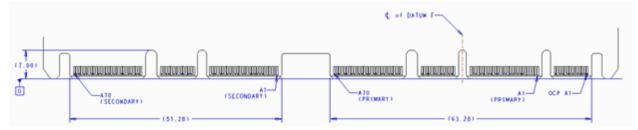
Large Size Card Gold Finger Dimensions – x32 – Bottom Side ("A" Pins)
